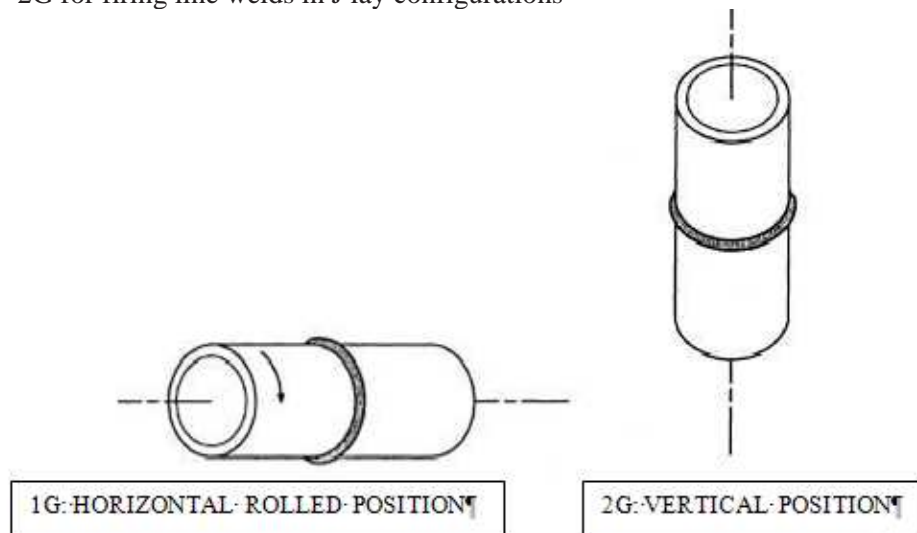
Welding positions for offshore risers and pipelines
